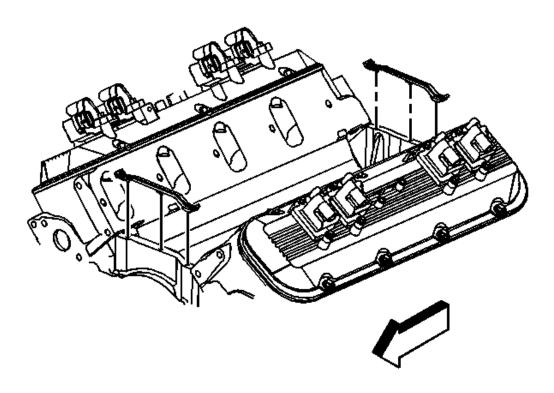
View Of Intake Manifold End Seals Courtesy of GENERAL MOTORS CORP.
